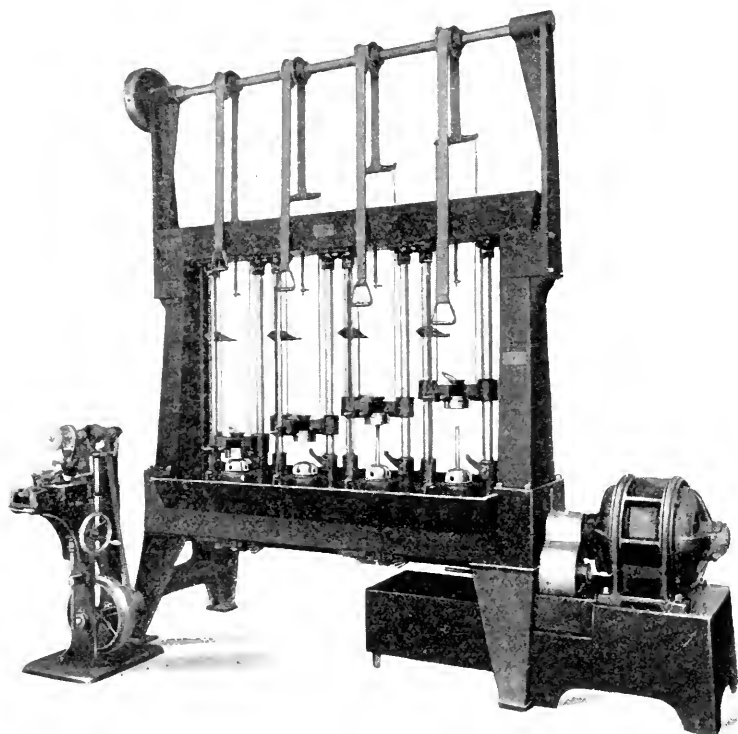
STAYBOLT-THREADING AND REDUCING MACHINE, WITH SPECIAL GRINDER FOR CUTTING TOOLS
